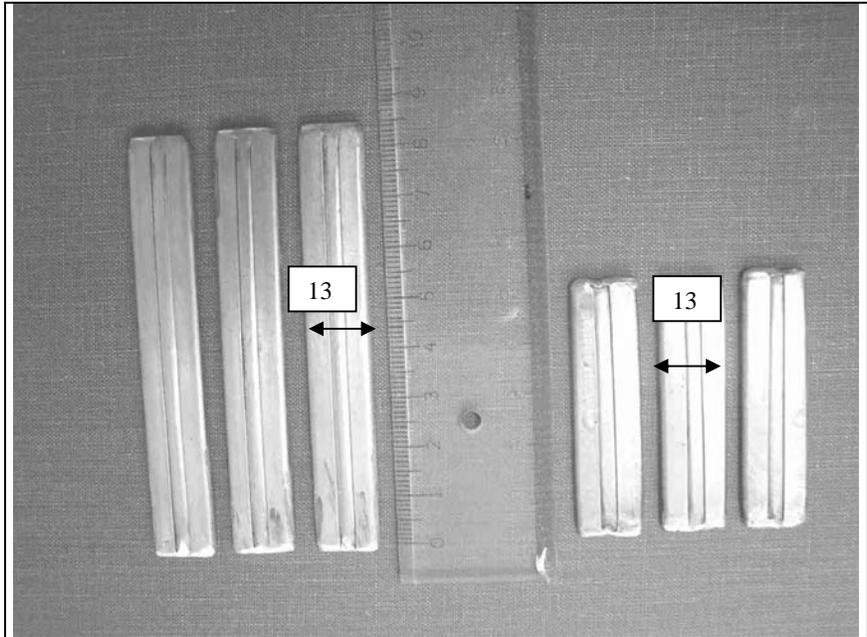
Straight Test Coupons without butt-welded joint
